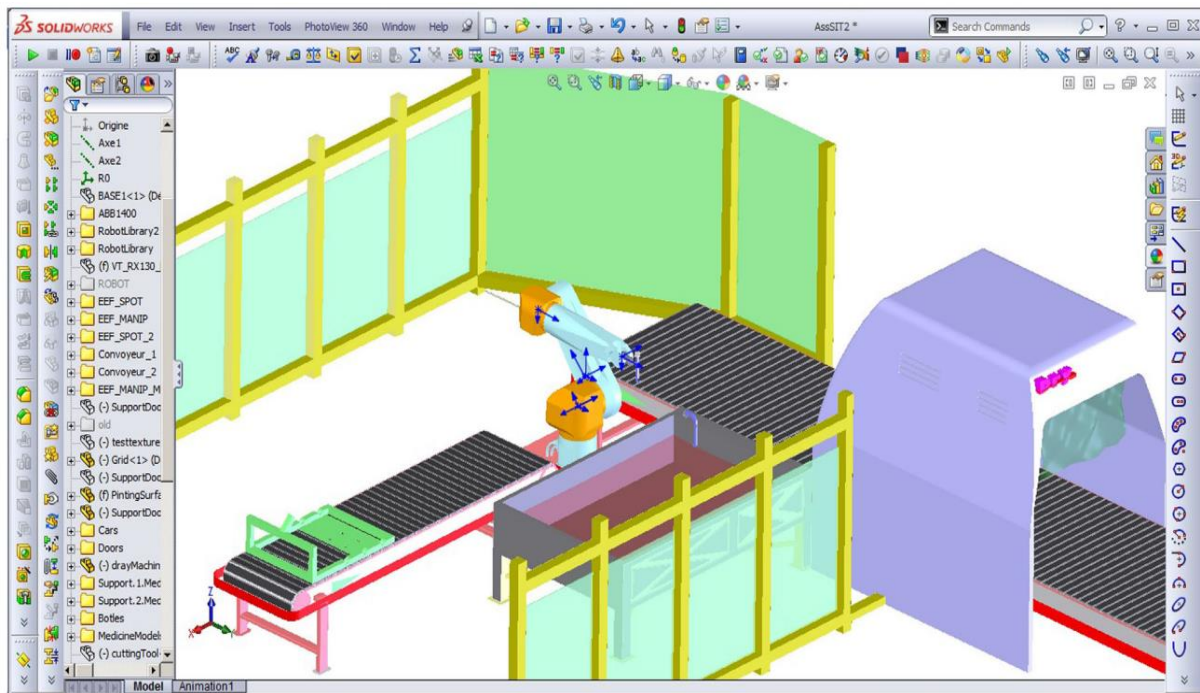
3D models of some objects in IROSim robotics library showing a robot manipulator, five spot welding tools, two conveyors, three tables, two drilling tools, a drying machine, two grippers, and a painting basin
